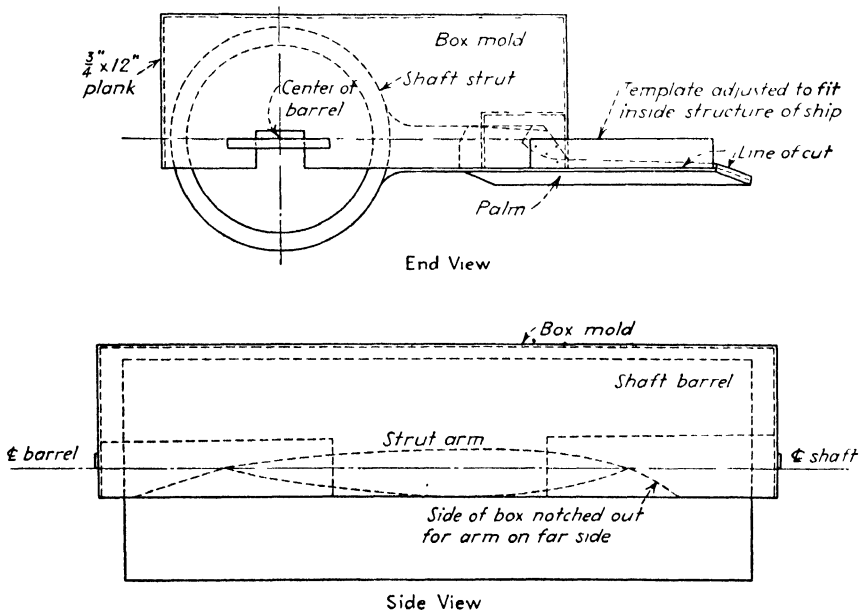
Template applied to one-arm strut for the purpose of machining off palm.
